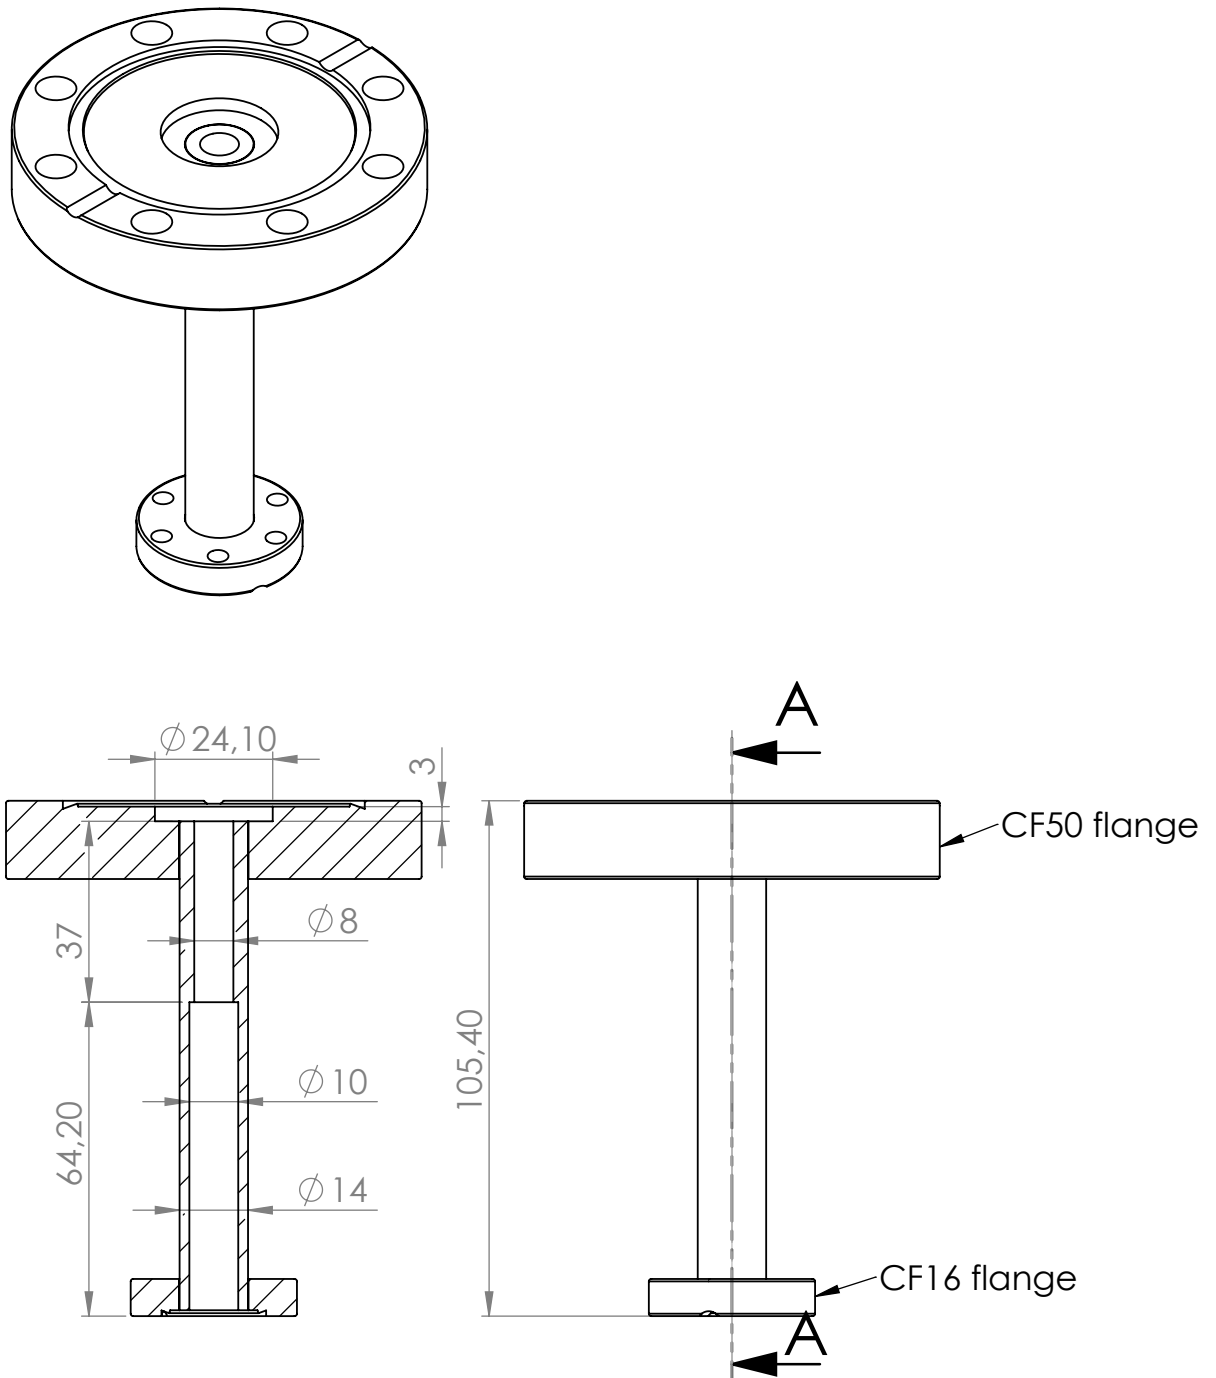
Technical drawing of the stainless steel rod of the differential pumping section. Dimensions are given in millimeter. Material: 1.4301.
